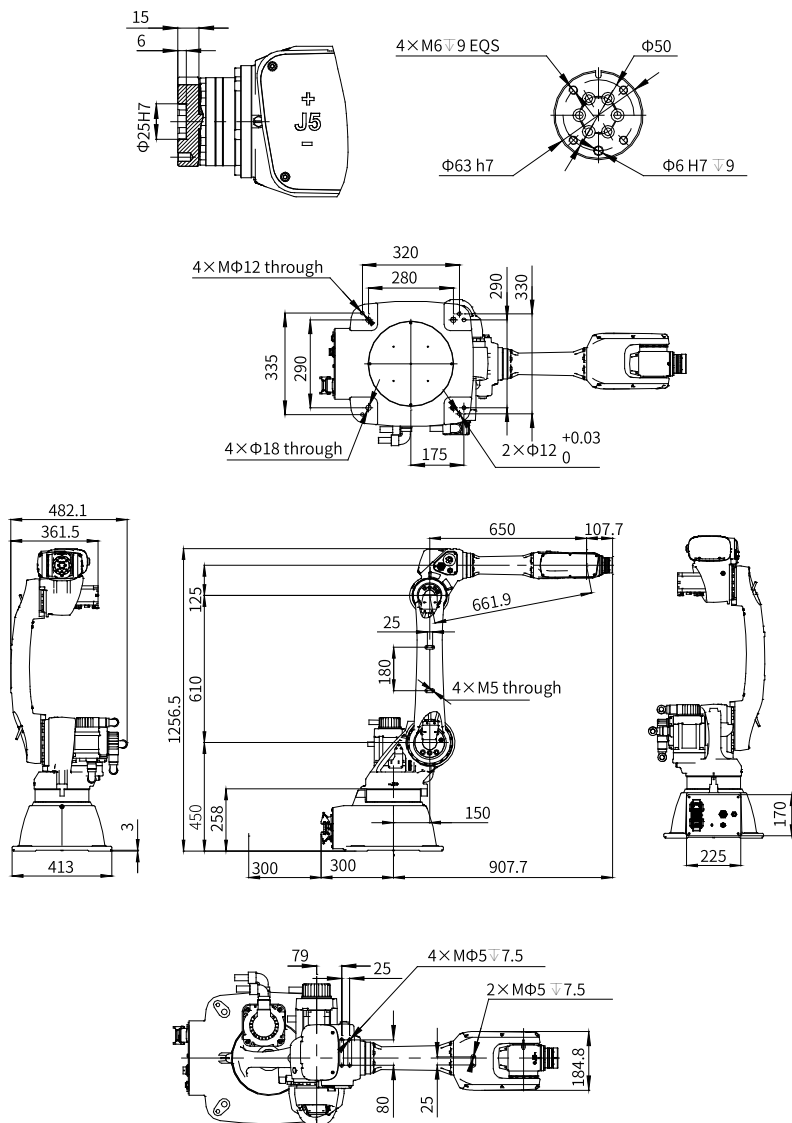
Outline dimensions for IR-R10-140S-INT (unit: mm)
